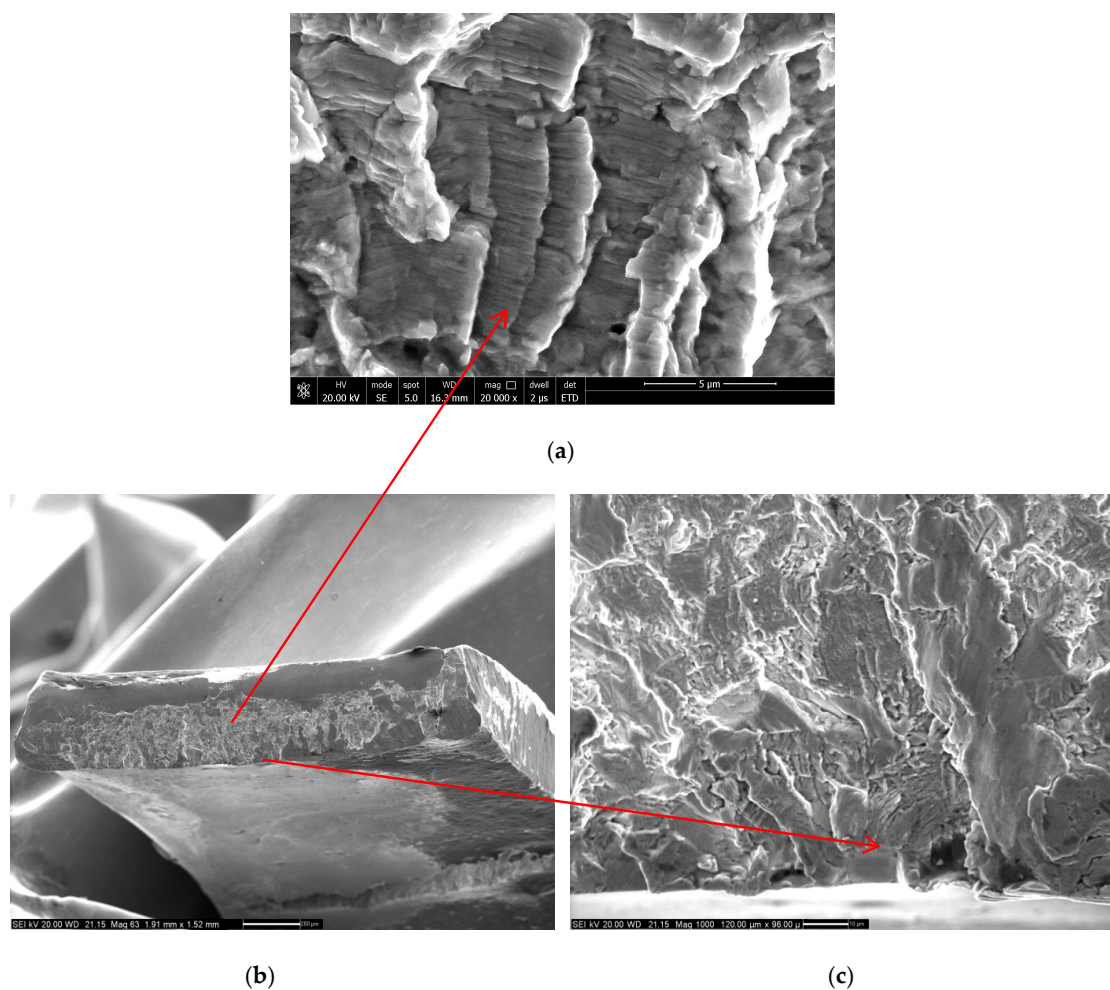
Typical fracture morphology of the cage: (a) fatigue striations; (b) fracture appearance; (c) fracture origin.
